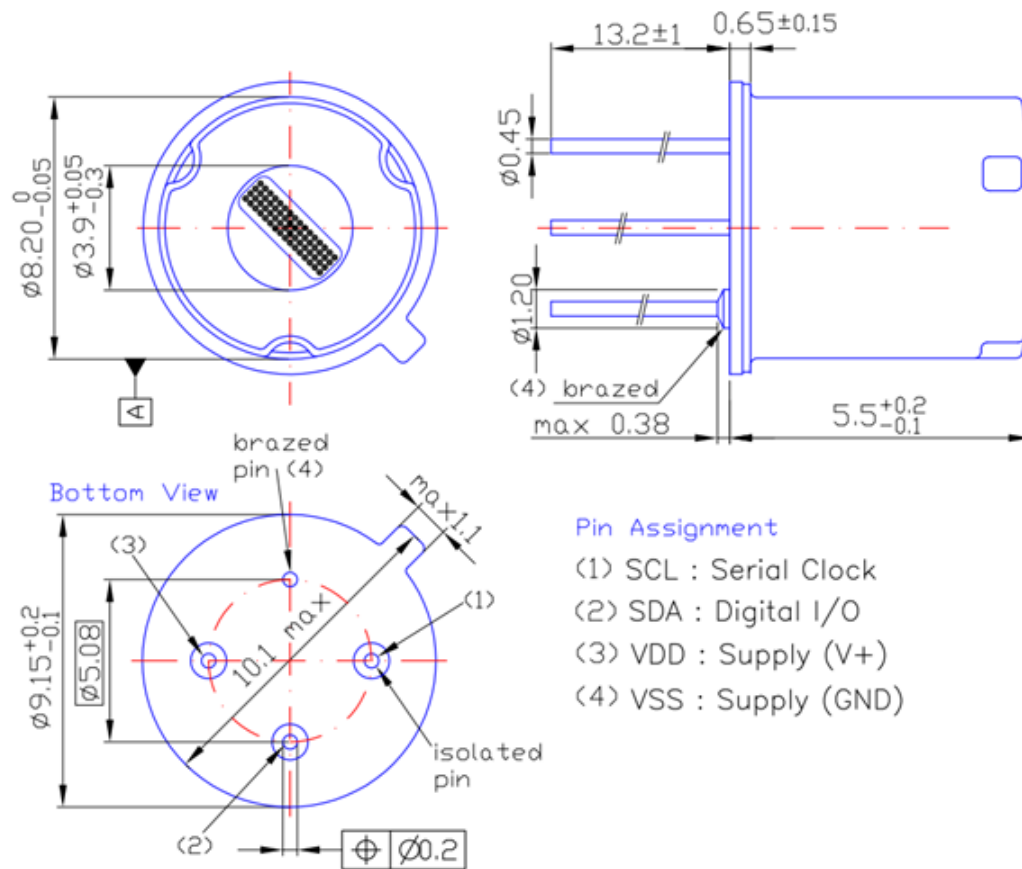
dimensional drawing of the HTPA16x4R1L2.85
